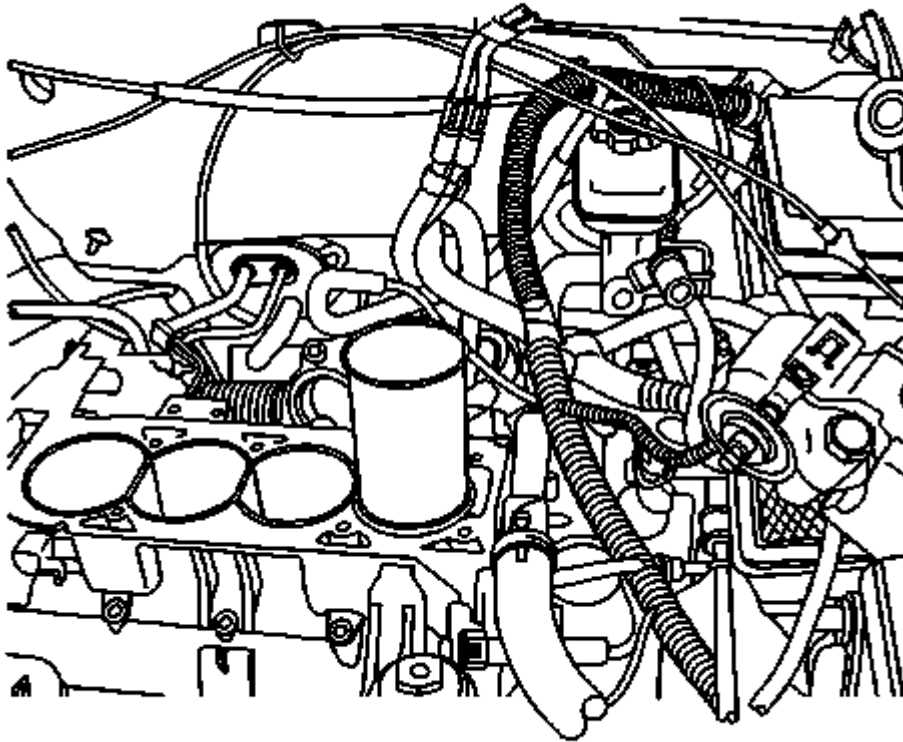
View of Cylinder Bore Sleeve Replacement into Cylinder Block
